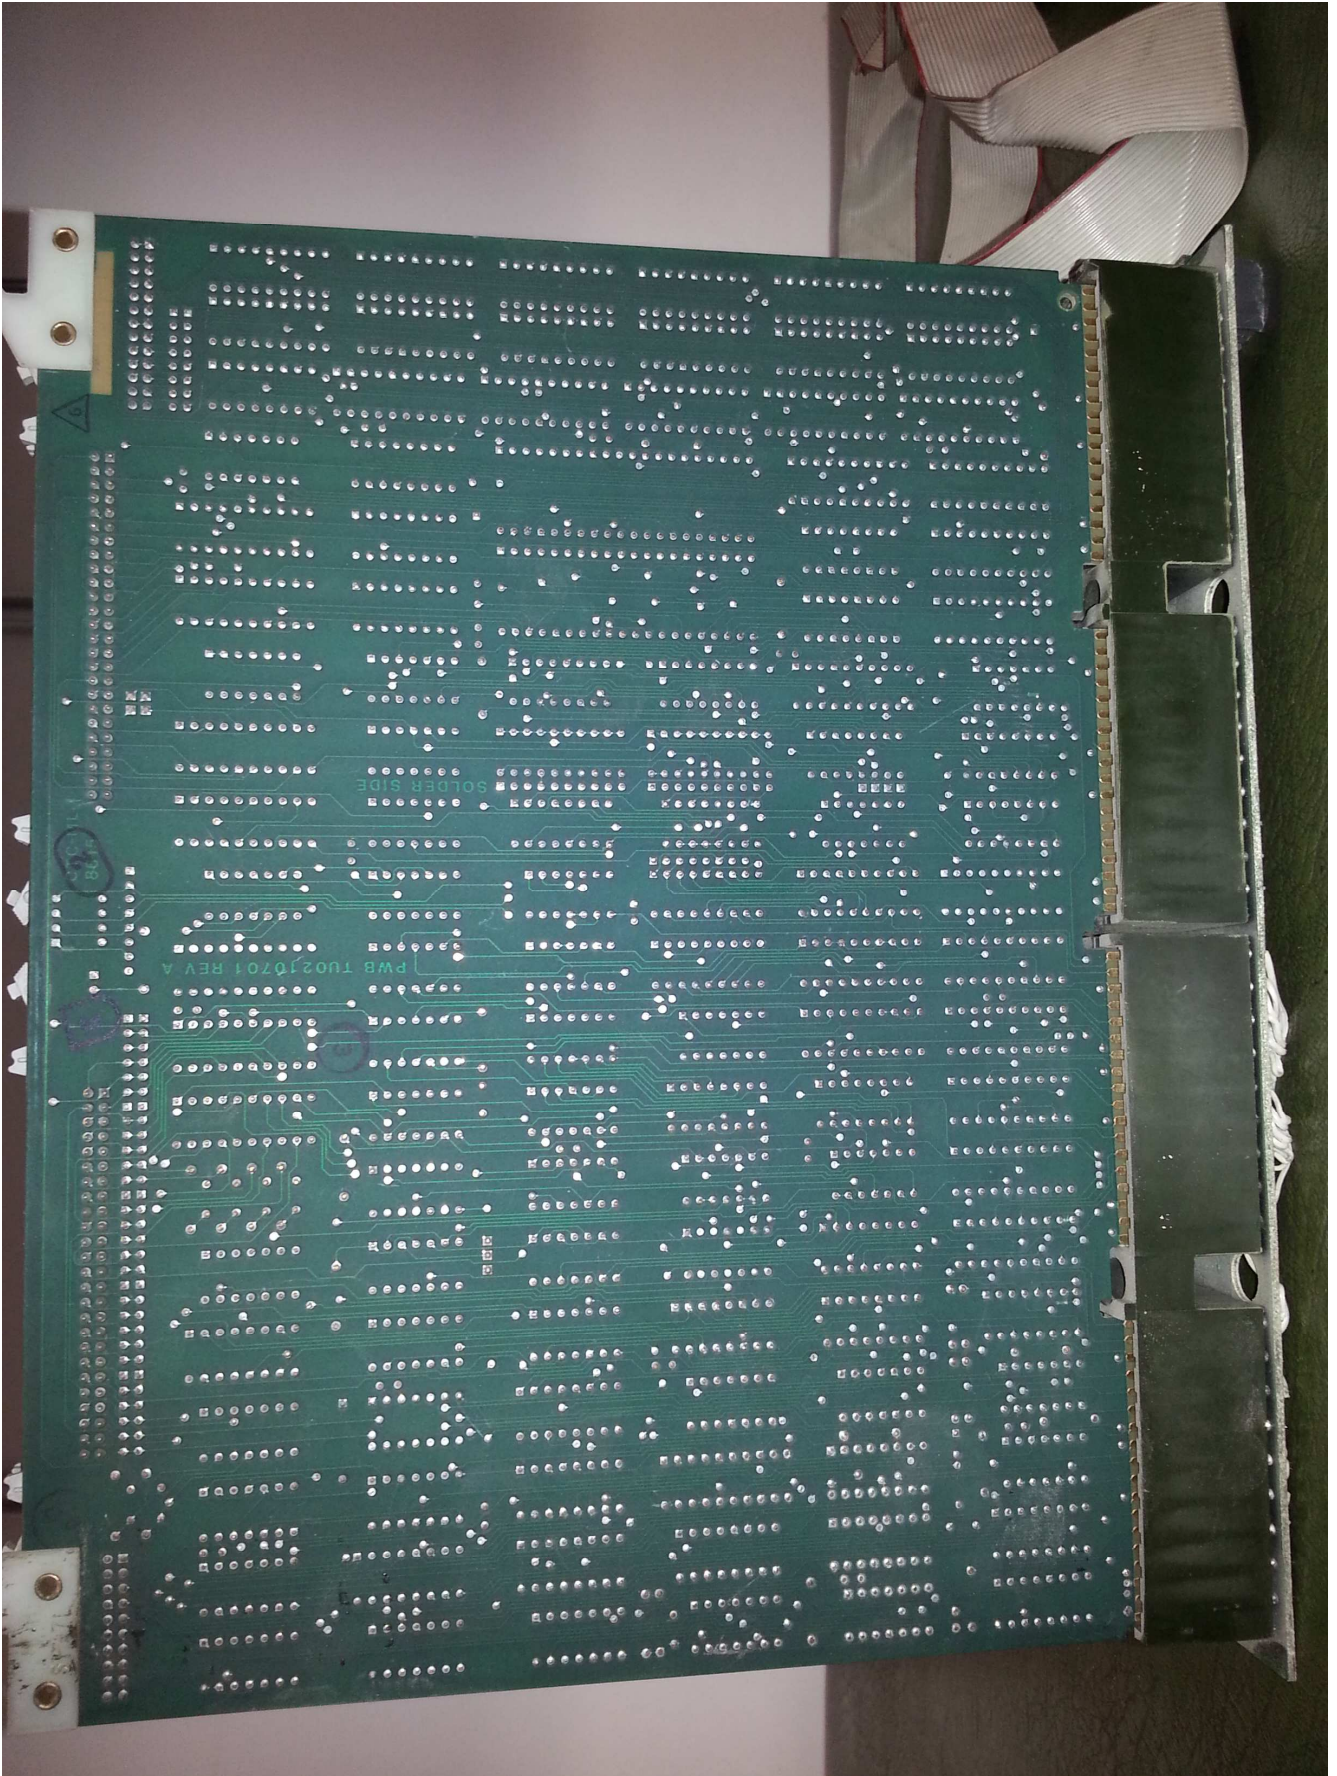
Emulex TU02 Qbus Tape Drive Controller bottom view
